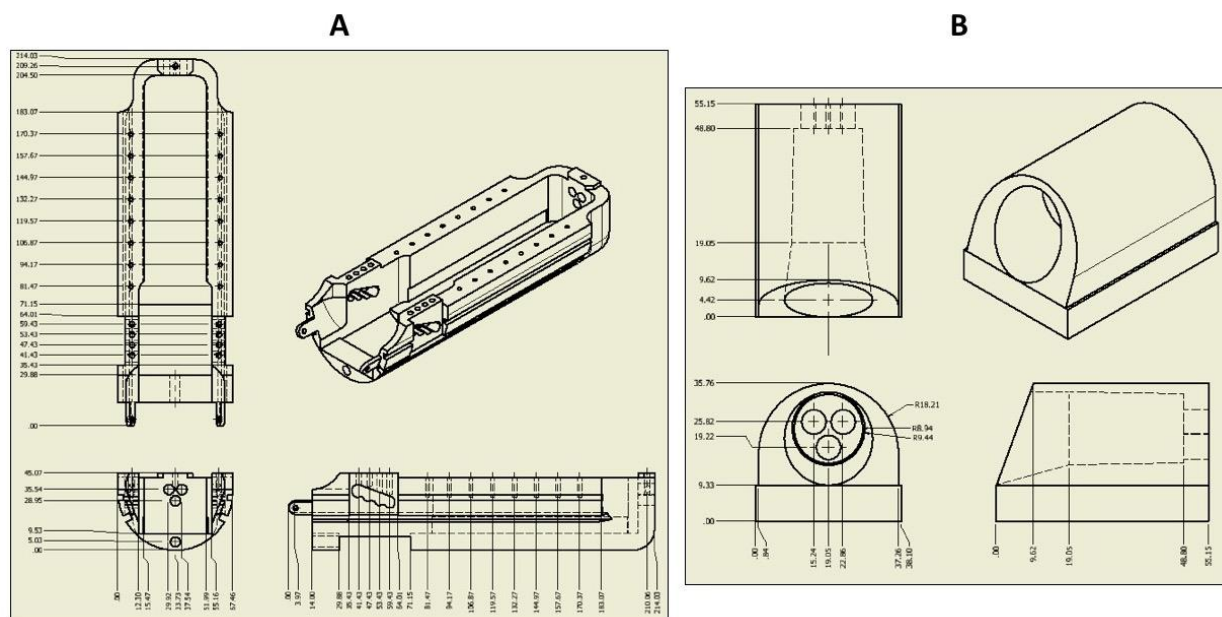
Annotated drawing layouts for the design process of the holder assembly.
